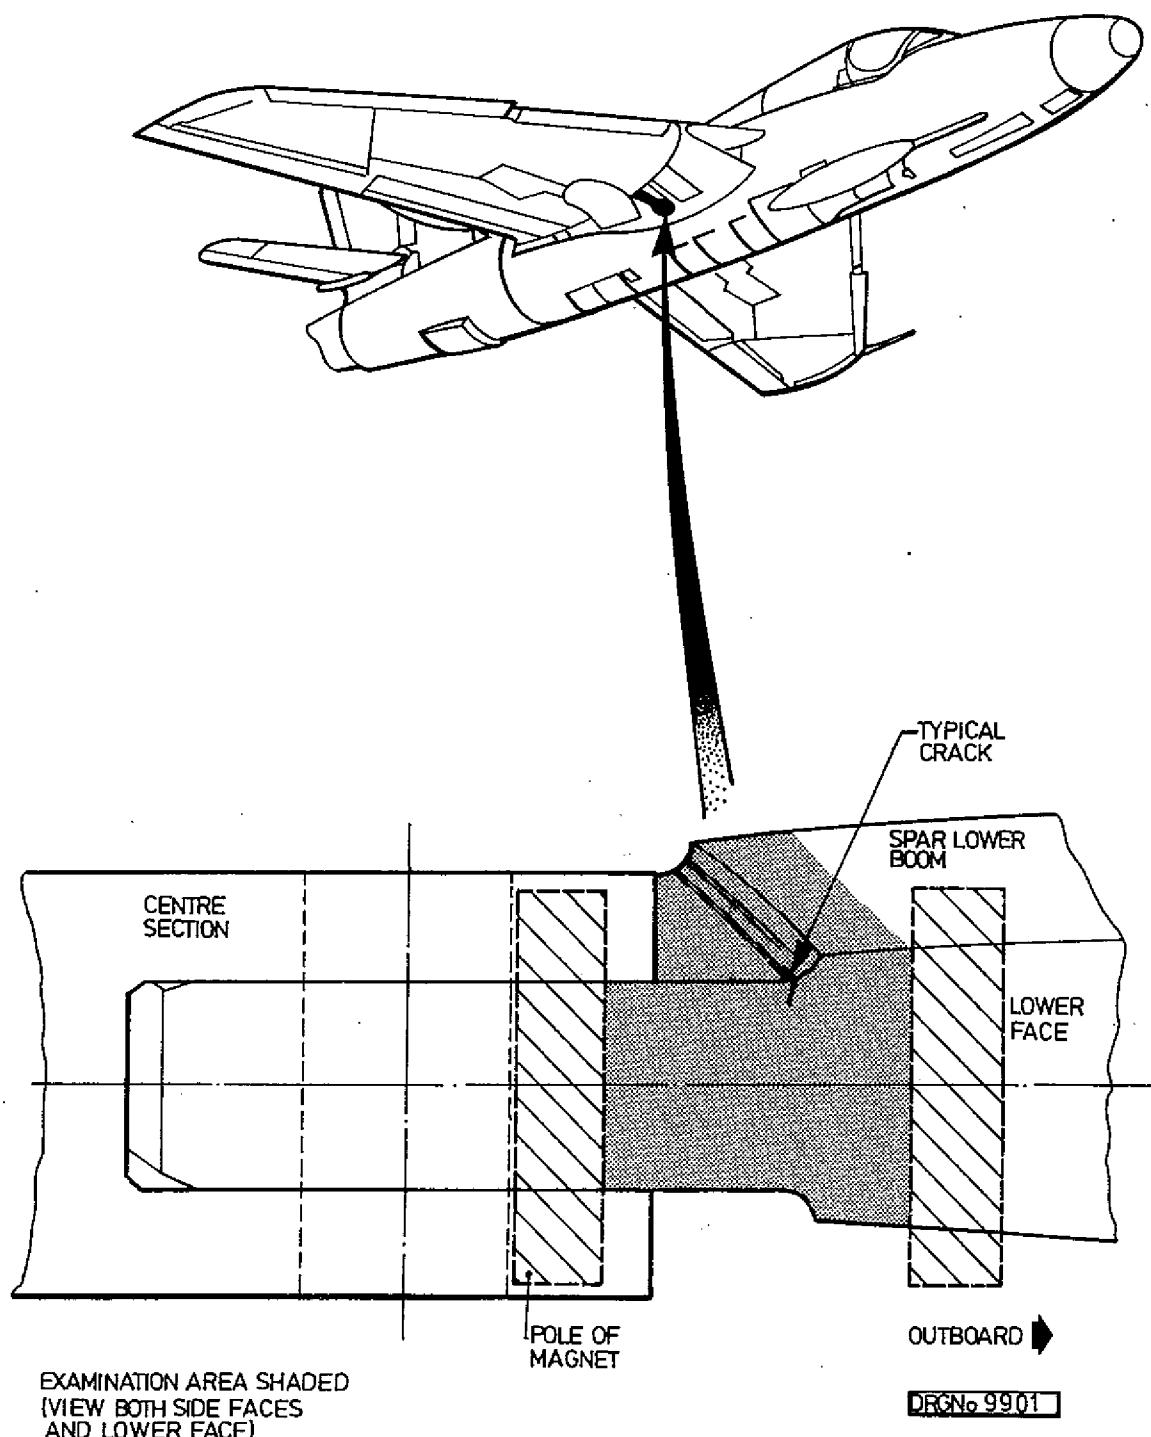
View of mainplane front spar lower boom to centre section joint showing examination area and magnet position
